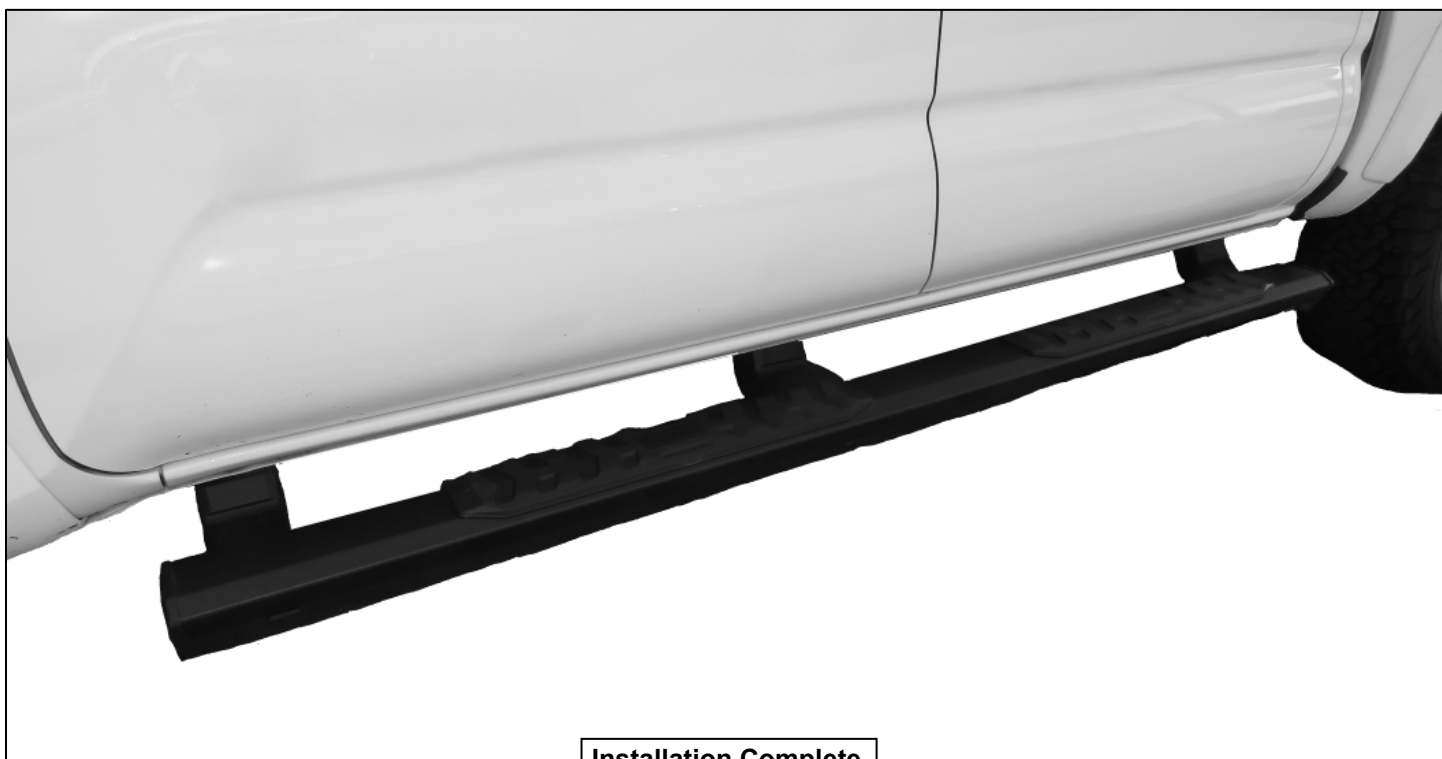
Attach Side Bar to all Passenger/Right Brackets until hand tight
